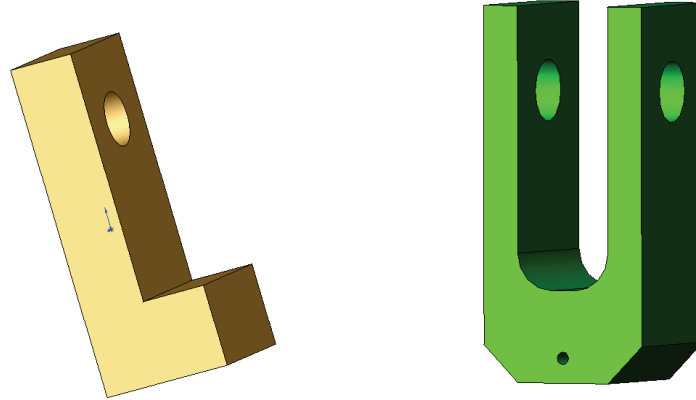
The old L-shaped and the new U-shaped valve holders.
